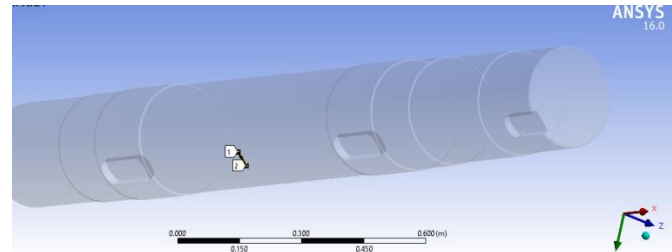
Modified Shaft Design 3 with Materials EN24 Fracture Analysis-SIFS K2
